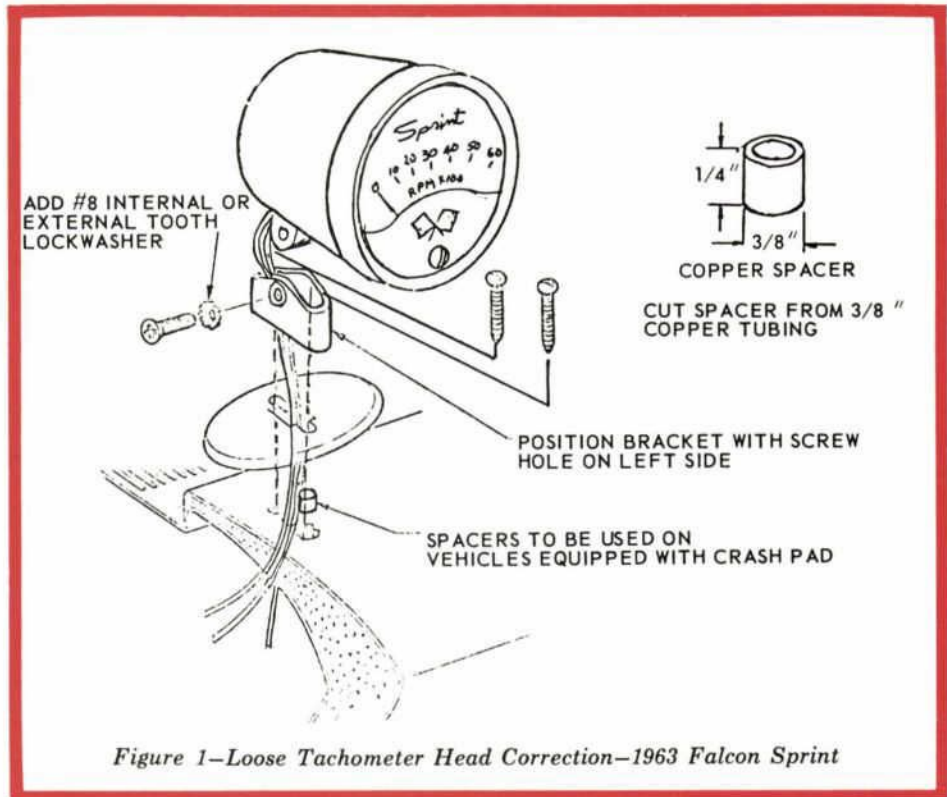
Loose Tachometer Head Correction—1963 Falcon Sprint
